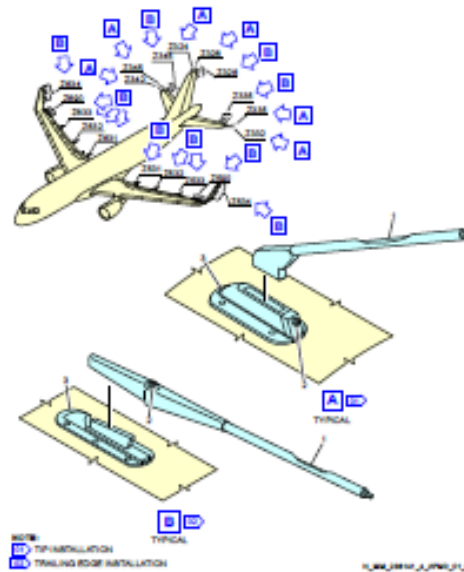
E (SHEET 1) - Static Discharger - Location and Detail
